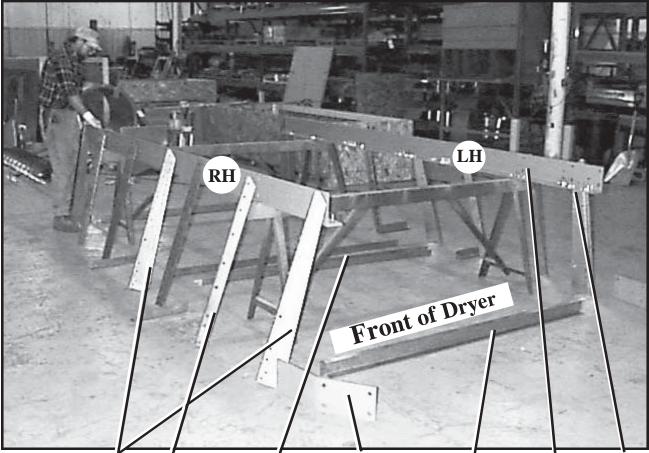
corner legs side leg frame tie channels* hitch bracket frame tie channel side rail angle hardware
